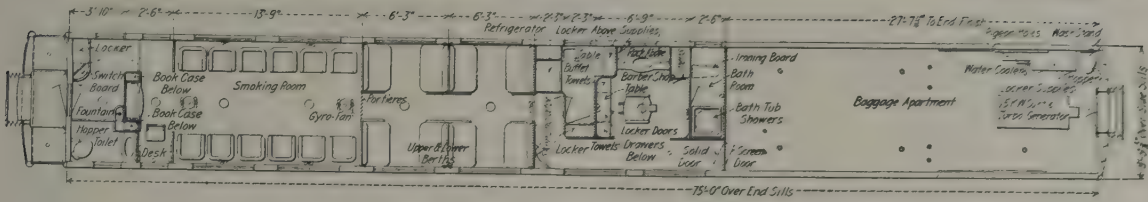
Floor Plan of Steel Buffet Baggage Car. Builder, The Pullman Company.
